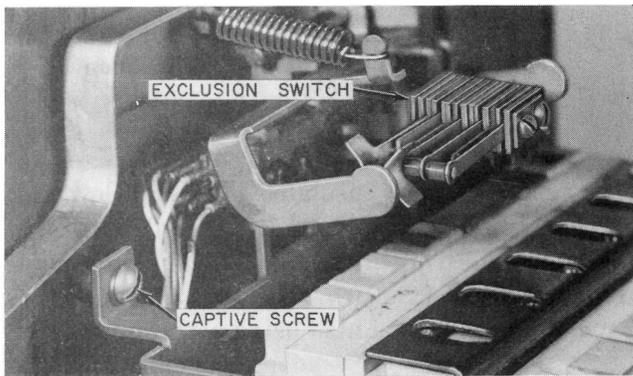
Exclusion Switch Installed and Hinged Chassis Mounting Screws (Early Version)
